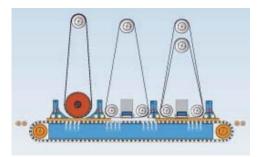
Scheme on how the Costa Levigatrici Series K calibrating sanding machine works.
